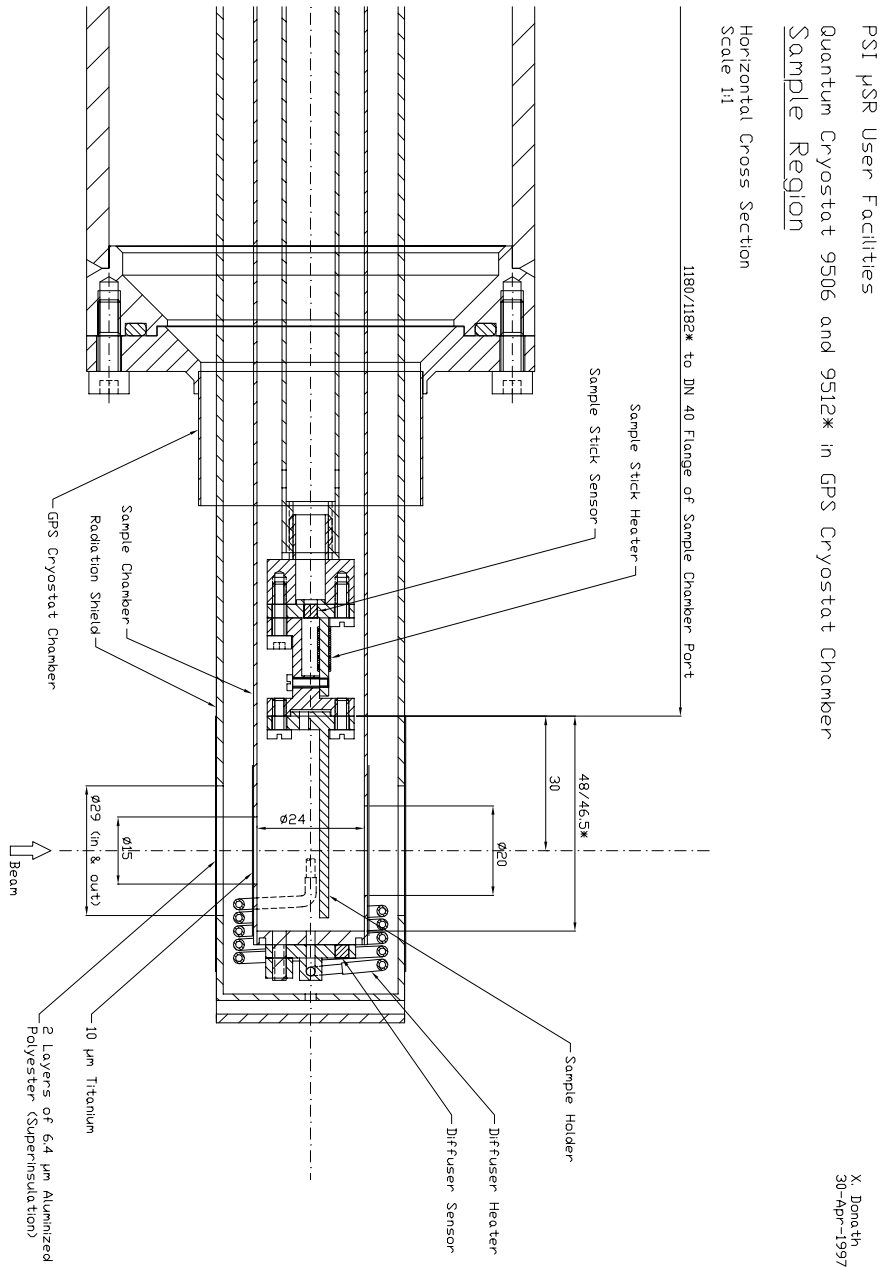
Drawing of the internal part of the Quantum cryostat inside the GPS chamber.
